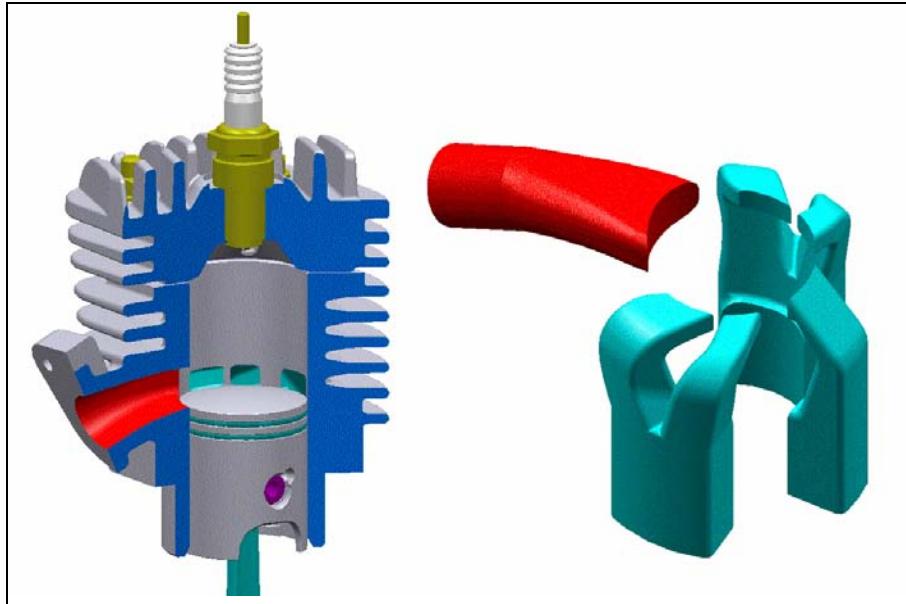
Cross-section through cylinder and cylinder head and ports geometry
